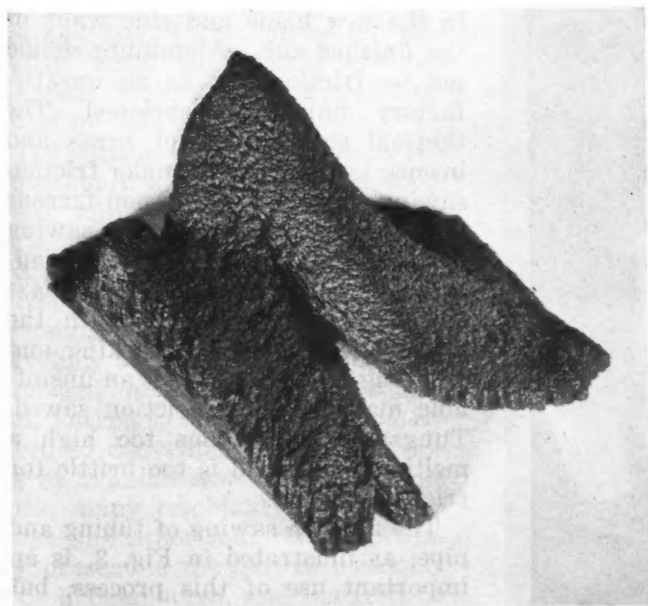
Metal Deposit Removed from Lower Wheel Guard of Friction Band-sawing Machine
